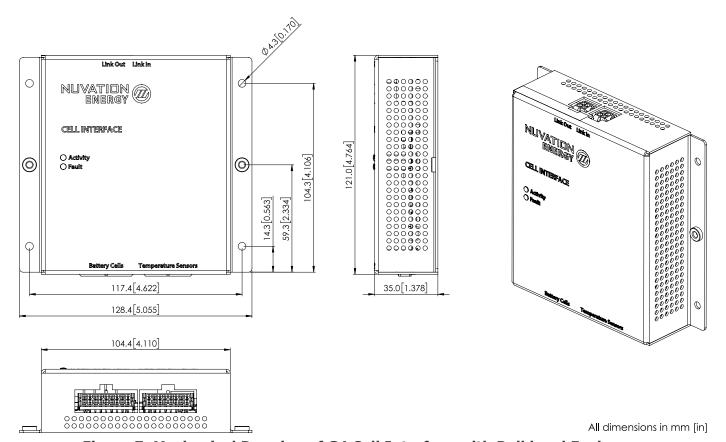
Mechanical Drawing of G4 Cell Interface with Bulkhead Enclosure
